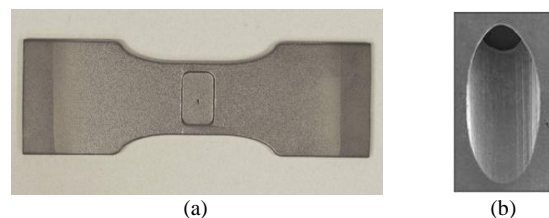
Photographs of a coated CMSX-4 single crystal flat coupon with a  $30^{\circ}$  hole (a) and a close-up image of a hole prior to coating (b).
